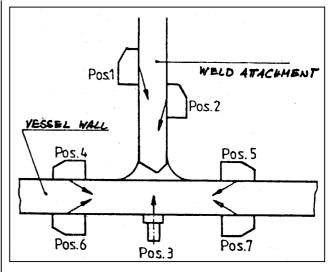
Probe positions for the weld seams of permanent weld attachments
